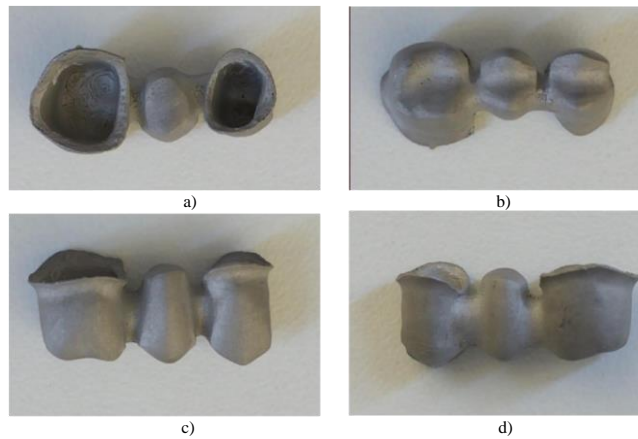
Macroscopic image of the experimental sample obtained by selective laser melting: a) upper vision; b) lower view; c), d) side view
